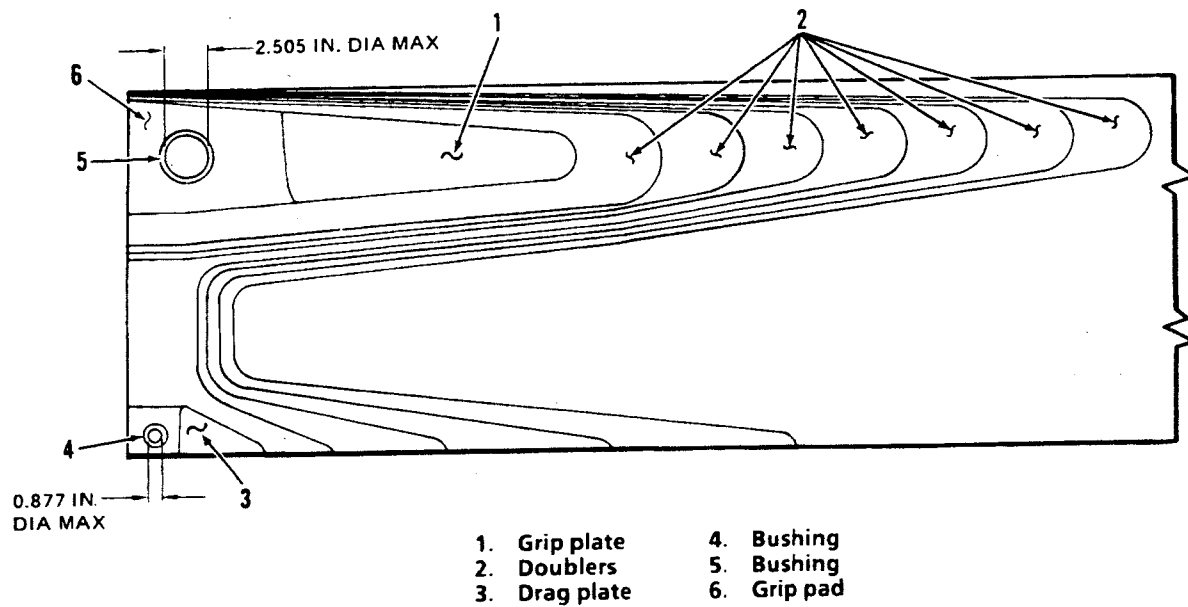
Doubler, Grip Plate, and Drag Plate Inspection Areas
